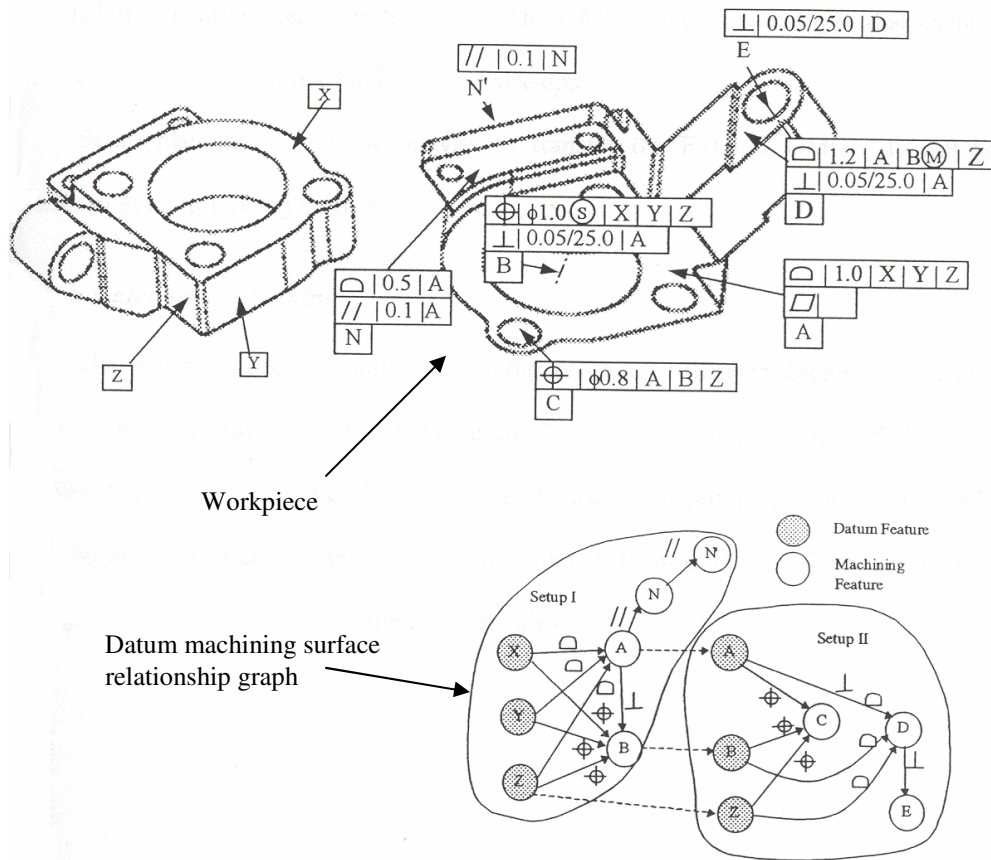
A workpiece and its datum machining surface relationship graph (Hu, 2001)
